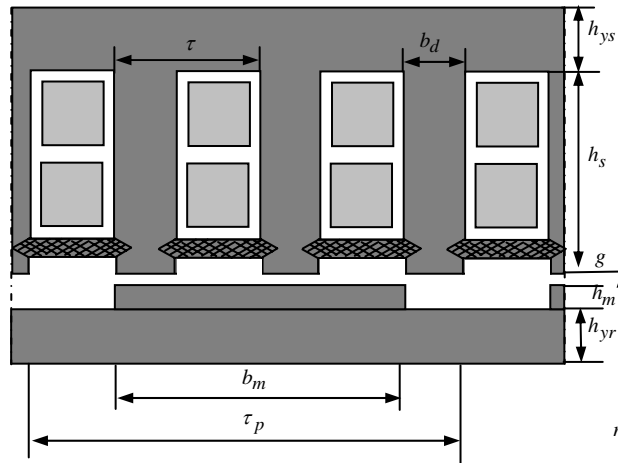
Basic dimension of one pole of a RFPM machine
